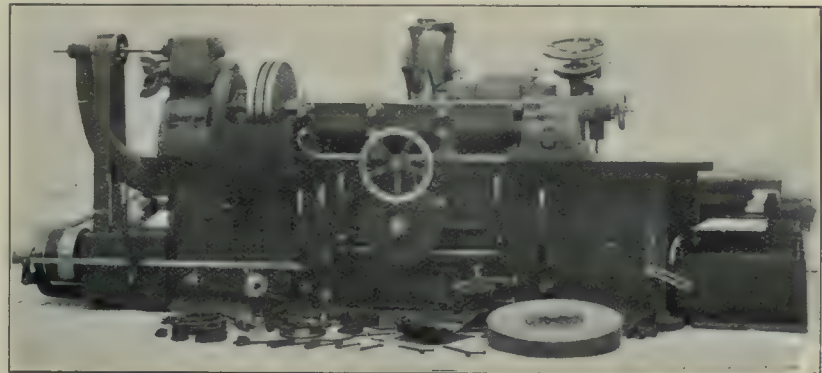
Landis Grinding Machine With Gap, Front View.
